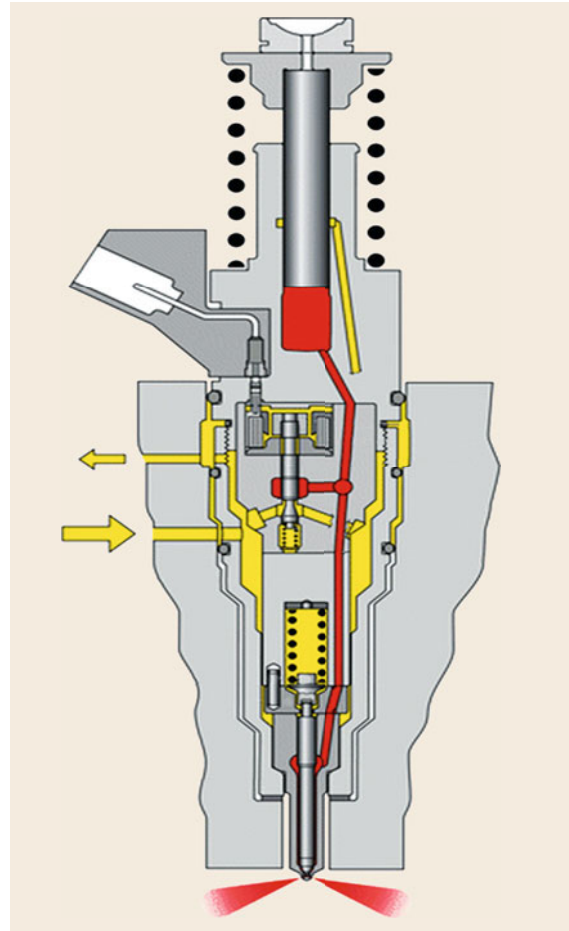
Unit injector, *small arrow*: fuel return, *big arrow*: fuel supply
